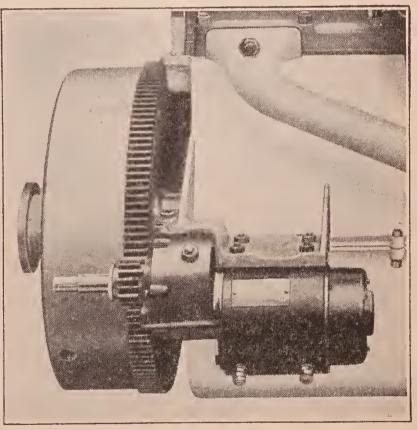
Double-Reducing Gear Type Installation, Wagner Starting Motor
